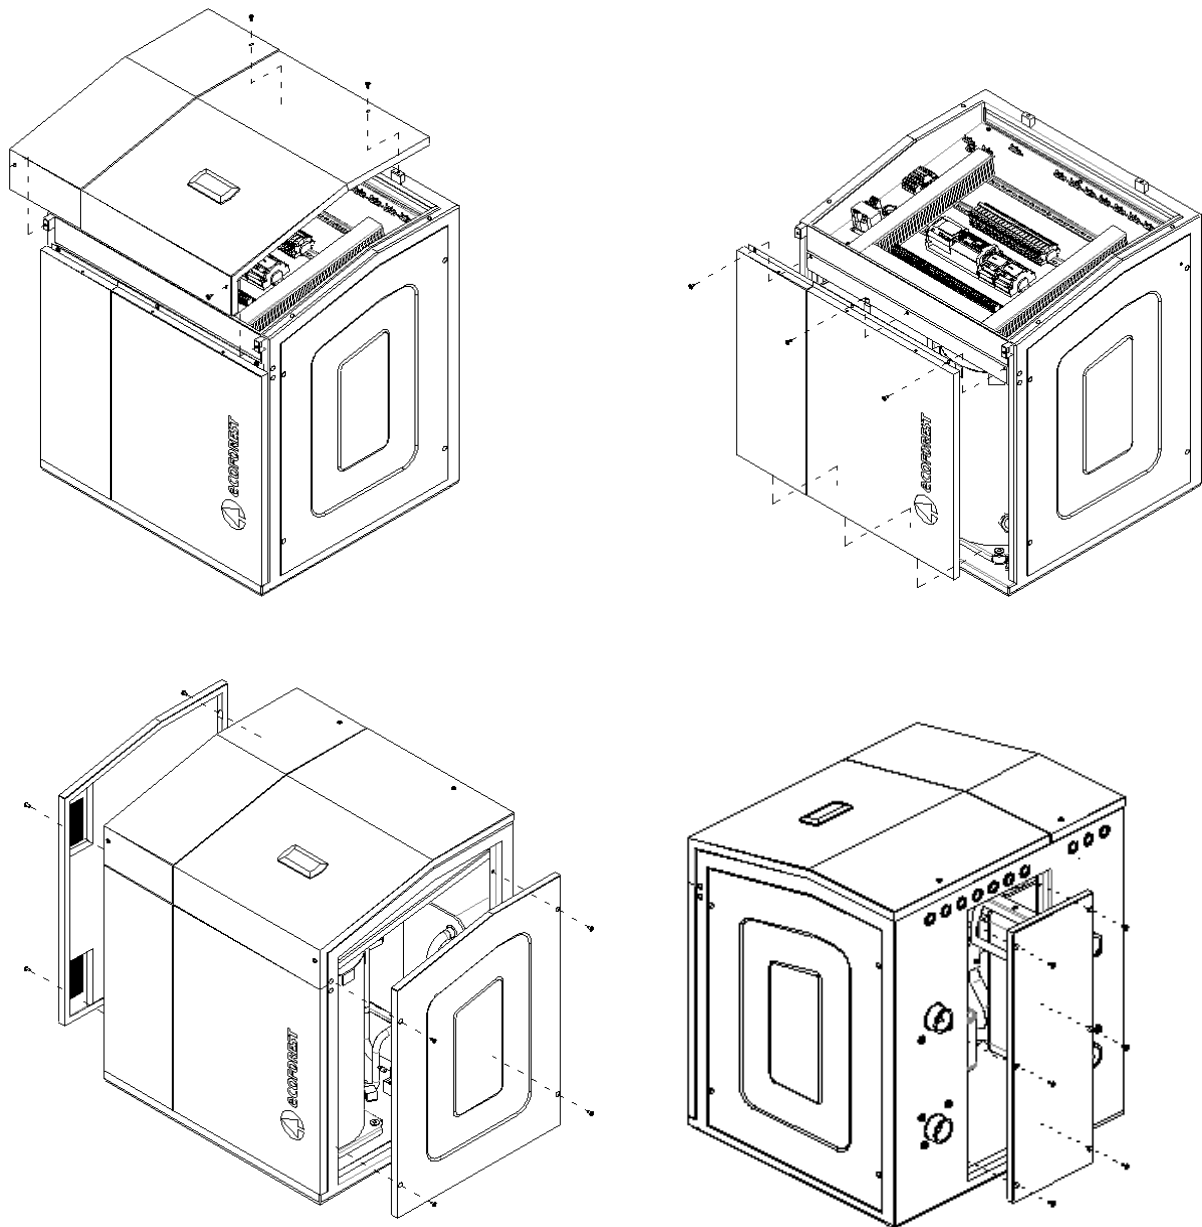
Disassembly of the covers of the ecoGEO HP models.
